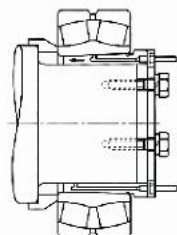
Mounting with Special Sleeve and Hydraulic Pressure
